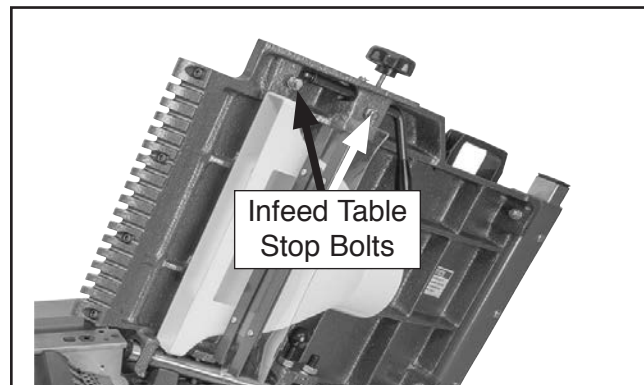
Location of infeed table stop bolts for adjusting infeed table parallelism.
